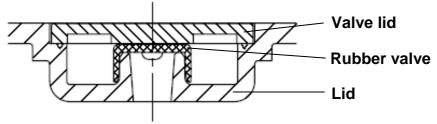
Valve design for Marathon L-blocks, Sprinter P
